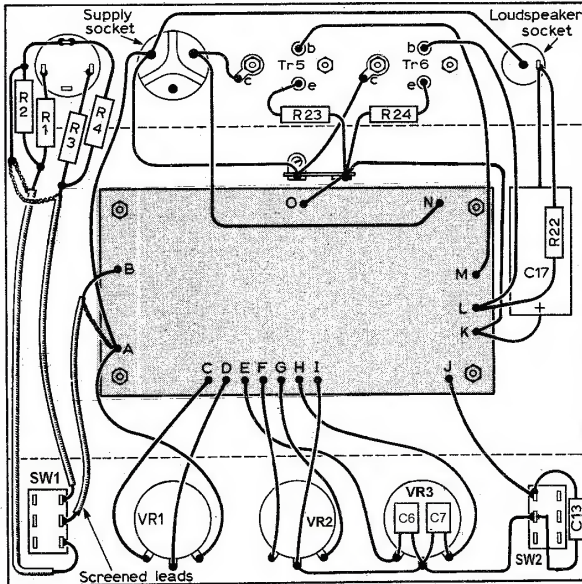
The wiring between the component board and those components mounted directly on the chassis.
